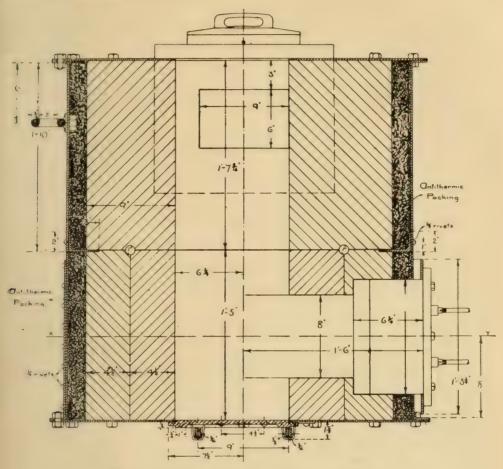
Sectional Elevation of 160-lb. Pot Furnace.
